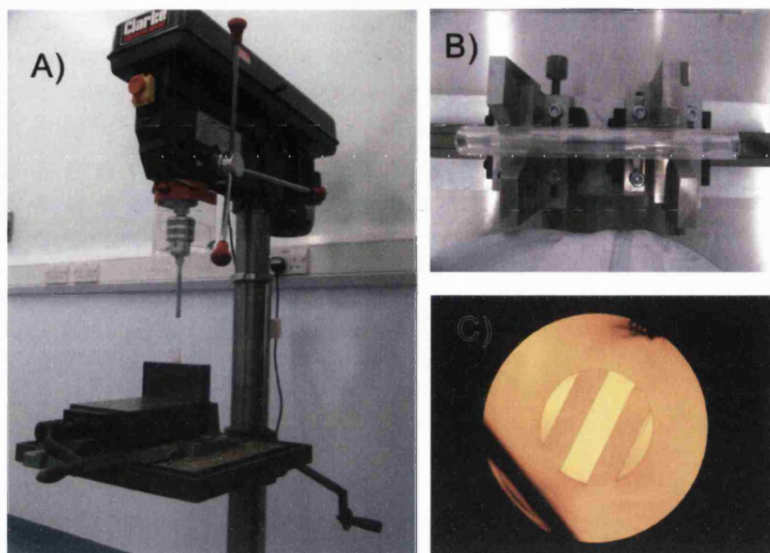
(A)Soft glass drilling apparatus. (B)Drilled and polished soft glass tube. (C)Lamellar core preform drawn directly from the drilled jacketing tube, which contains 5 layers of glass plates.
